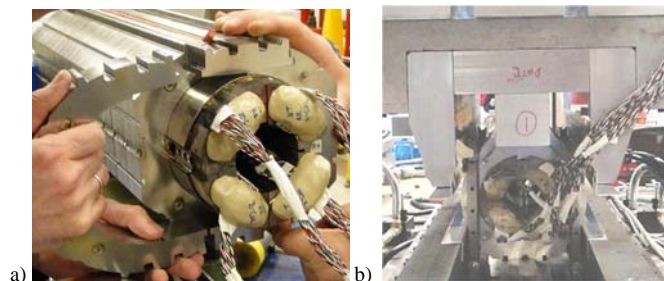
Collar packs assembly around shimmed coils (a) and model placement into collaring tooling (b).
